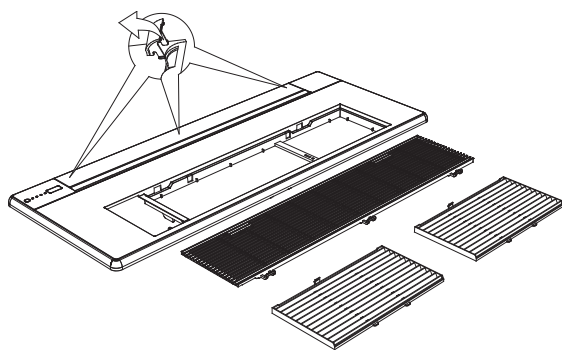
Open Fan Guide Vane and Remove 3 Concealed Cap Screws
